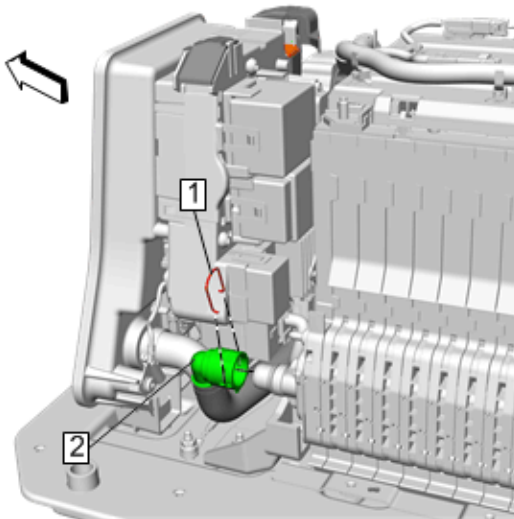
High Voltage Battery Cooling Manifold Outlet Hose And Retainer
